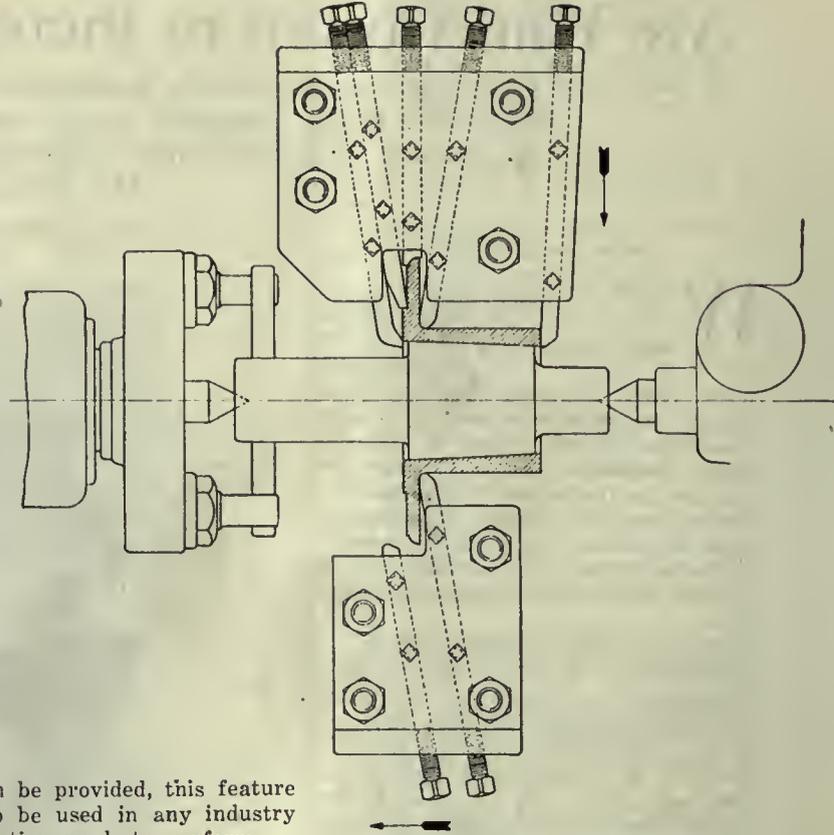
TURNING, FACING, AND FLANGING OF AUTOMOBILE WHEEL HUB.
